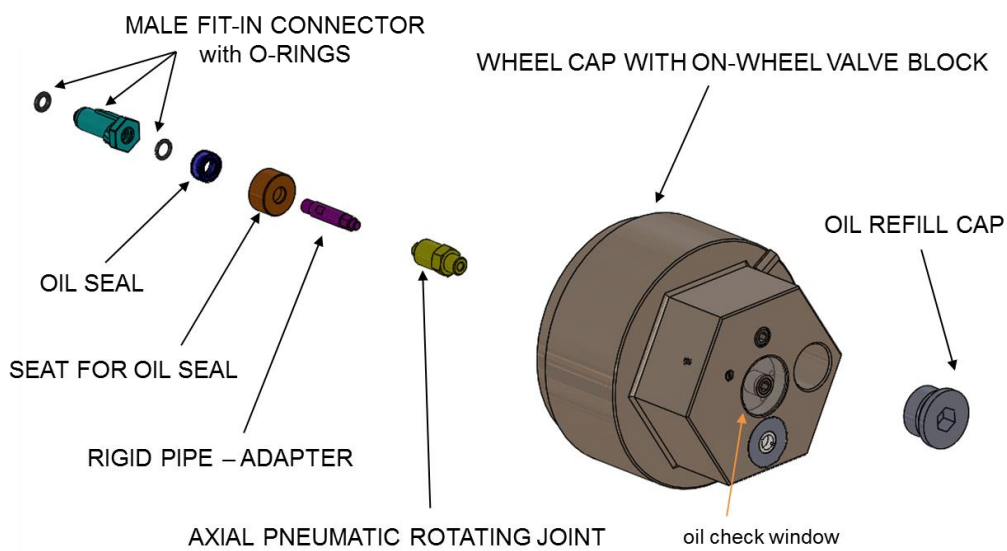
Integration of the ACTIS system on HDV: solution for front steering (non-driving) wheels: global view of the wheel-end assembly.
